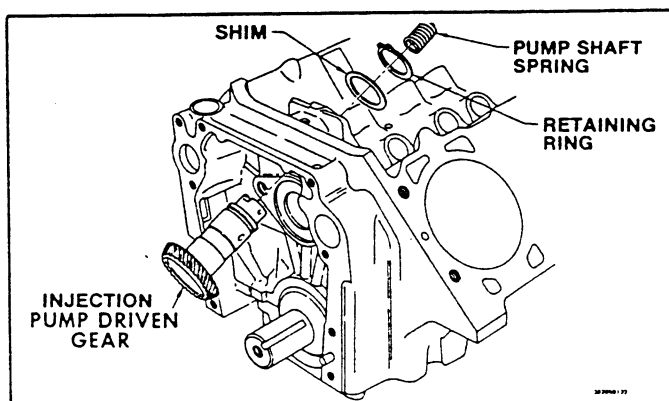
Injection Pump Driven Gear, Spring and Shim
